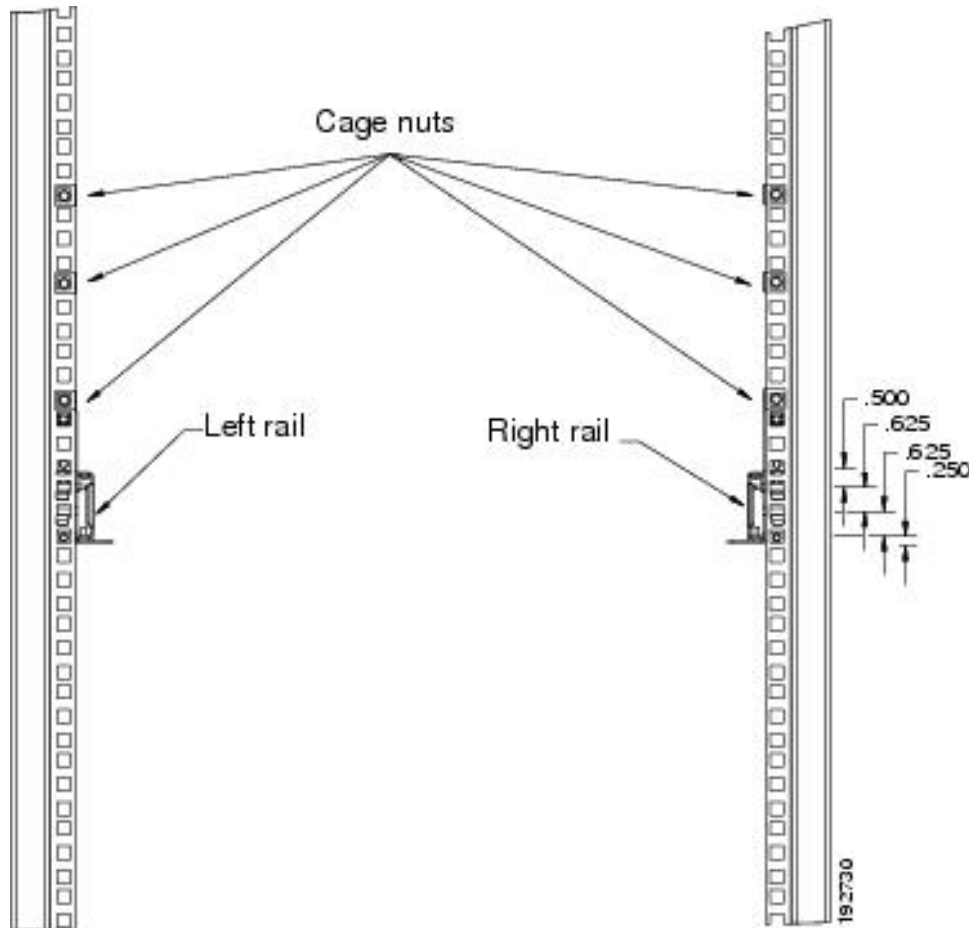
Installing Tool-less Chassis Support Rails into the Rack
